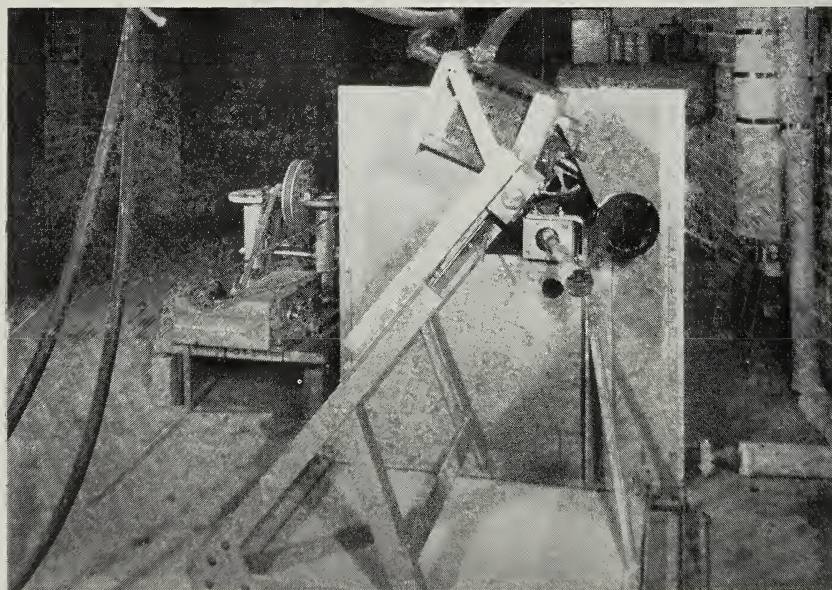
View of crucible in pouring position showing arrangement of steam gun and pressure gauge.
